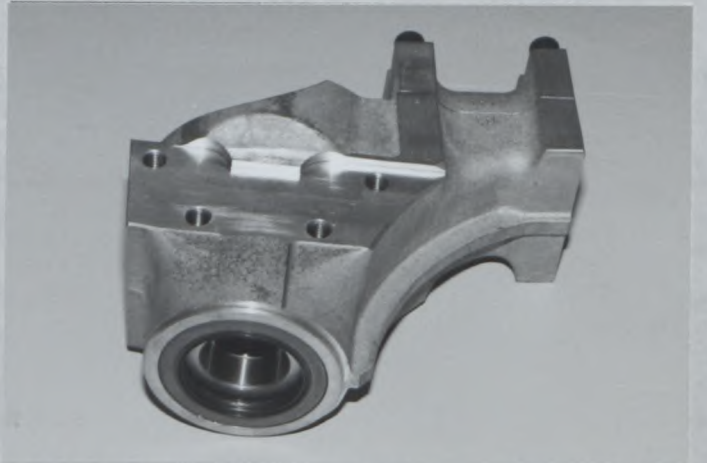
FRONT AND/OR REAR CALIPER MOUNTING BRACKET
